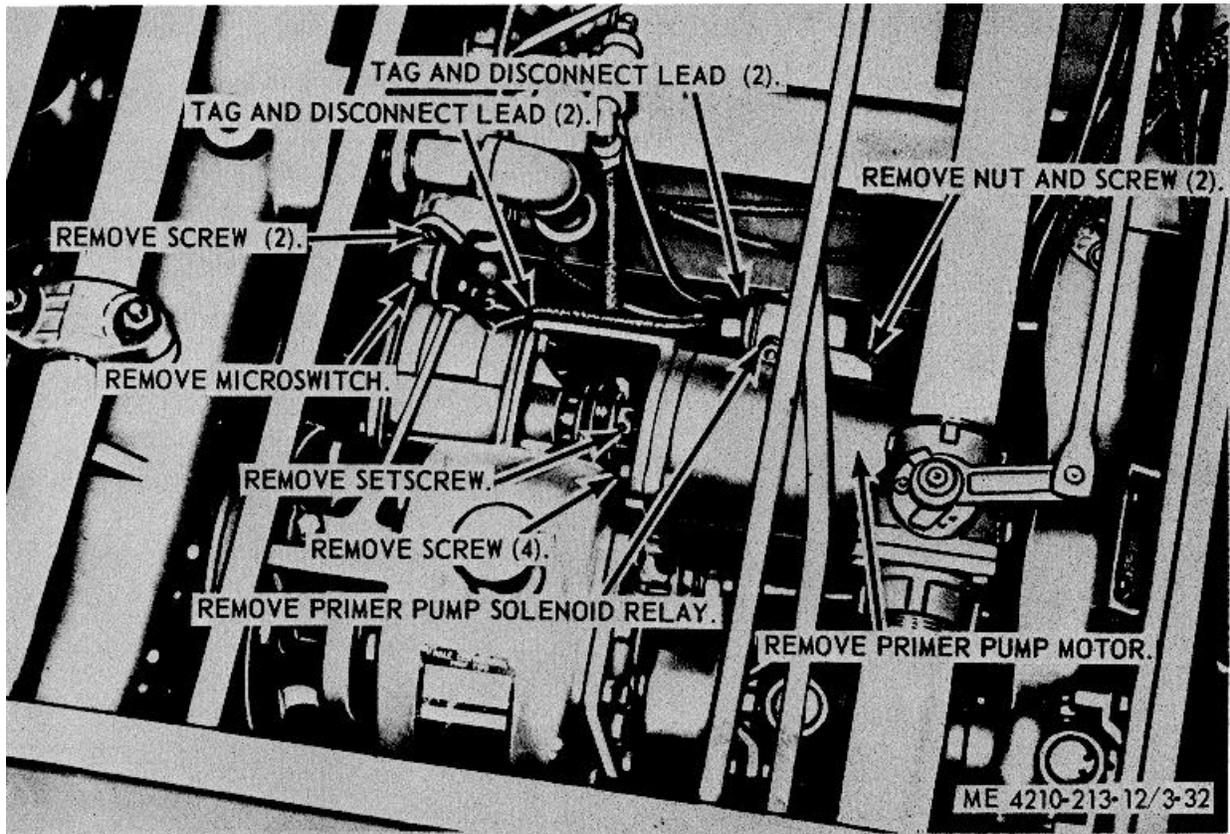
Primer pump solenoid, primer pump, and motor, removal and installation.
